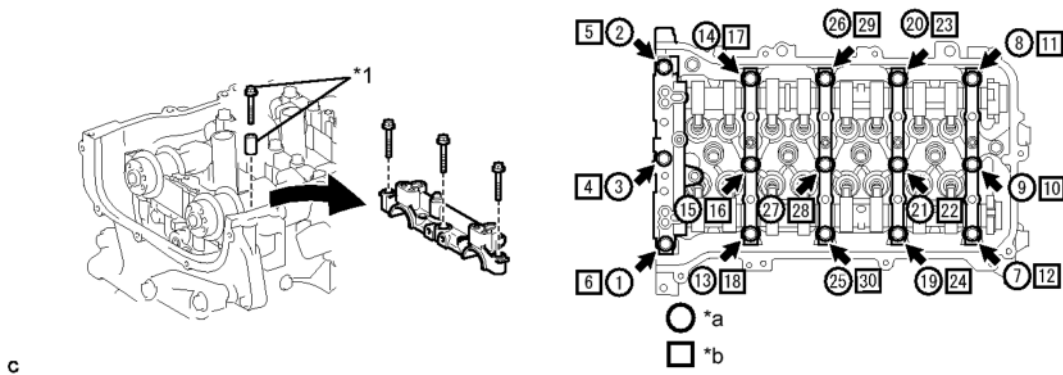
Identifying Bearing Cap, Bolt & Spacer Sequences
